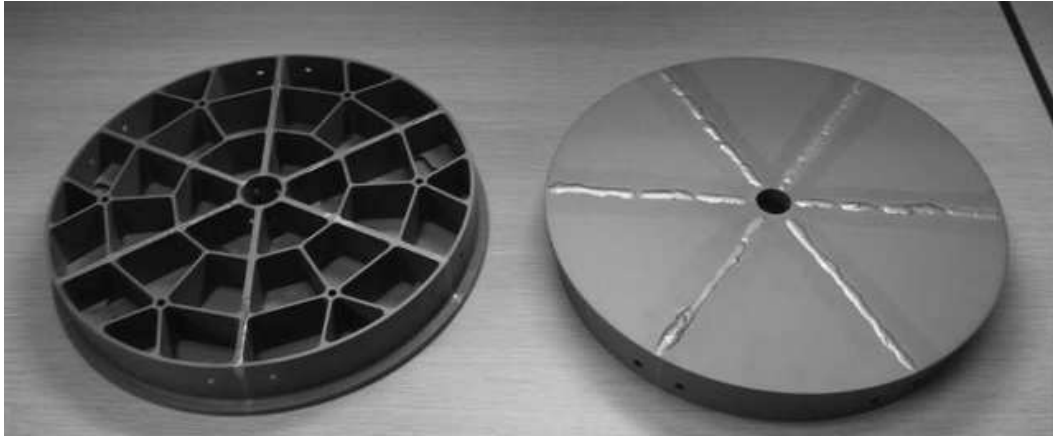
Brazed mirror assembly before optical face grinding and CVD
